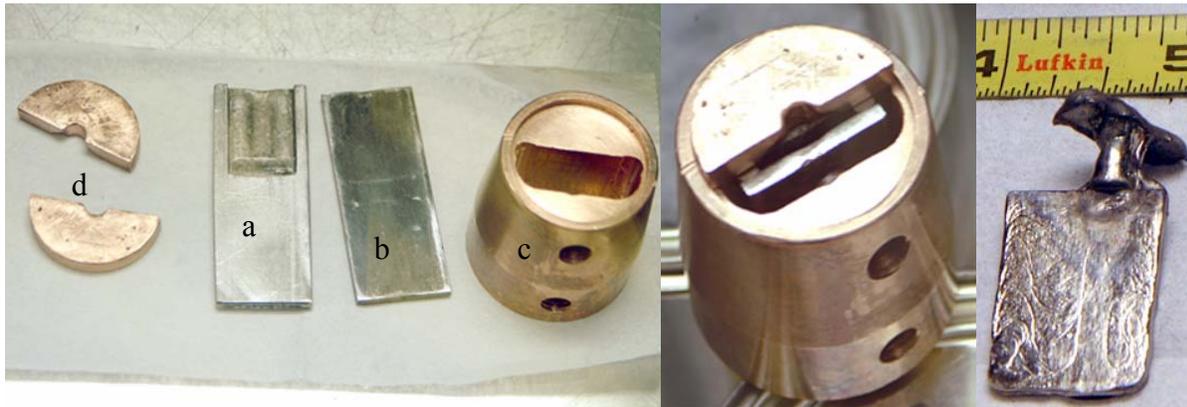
Arc-Casting Hearth. To cast U-Mo alloys into coupons for further processing the arc-casting hearth is used. The disassembled hearth is shown at left. The coupon mold (a) and cover plate (b) are held together by set screws in the copper hearth (c). The split copper melting platform (d) is positioned over the mold cavity. The assembled hearth (middle) is shown with one segment of the split copper melting platform removed to expose the mold cavity. The resulting coupon is shown at right. The sprue (at the top of the coupon) is removed prior to further processing.
